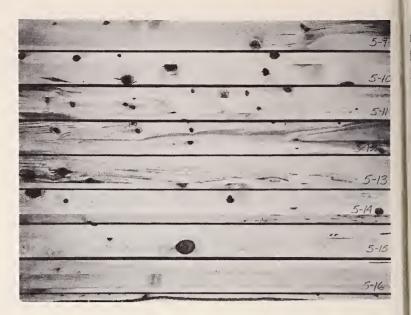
The rough-sized edge-glued siding stock was photographed to provide a record of defect location.
